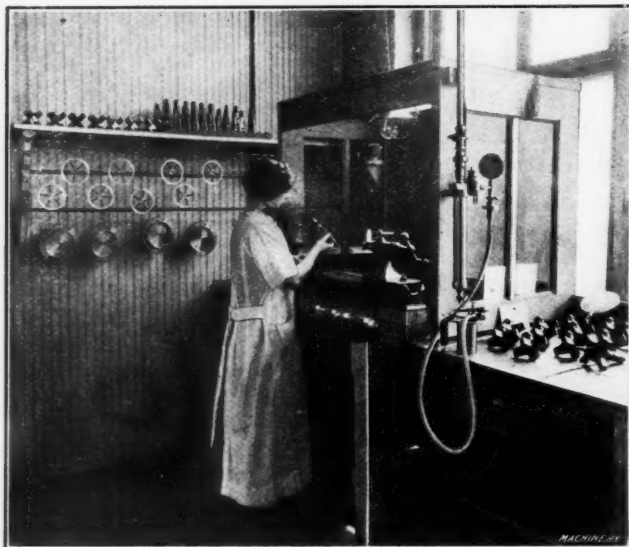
Lacquering Round Pieces mounted in a Lathe
